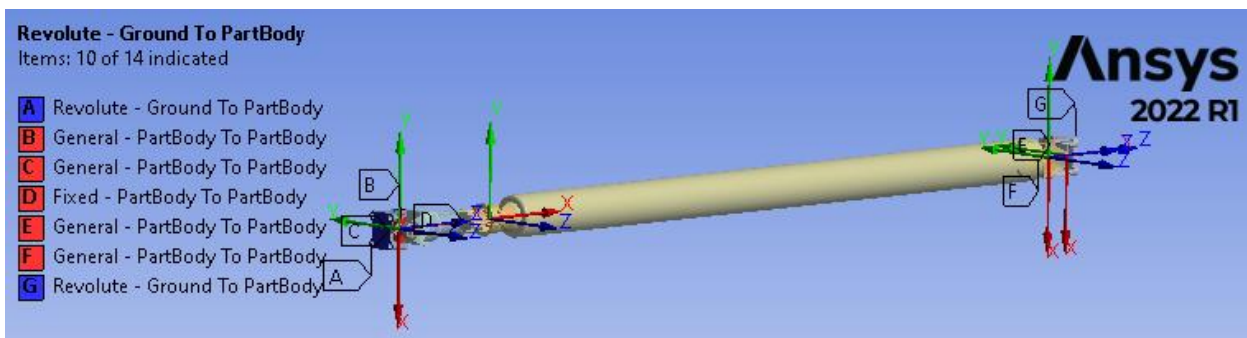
Joint connection of the one-piece modified model without center bearing
